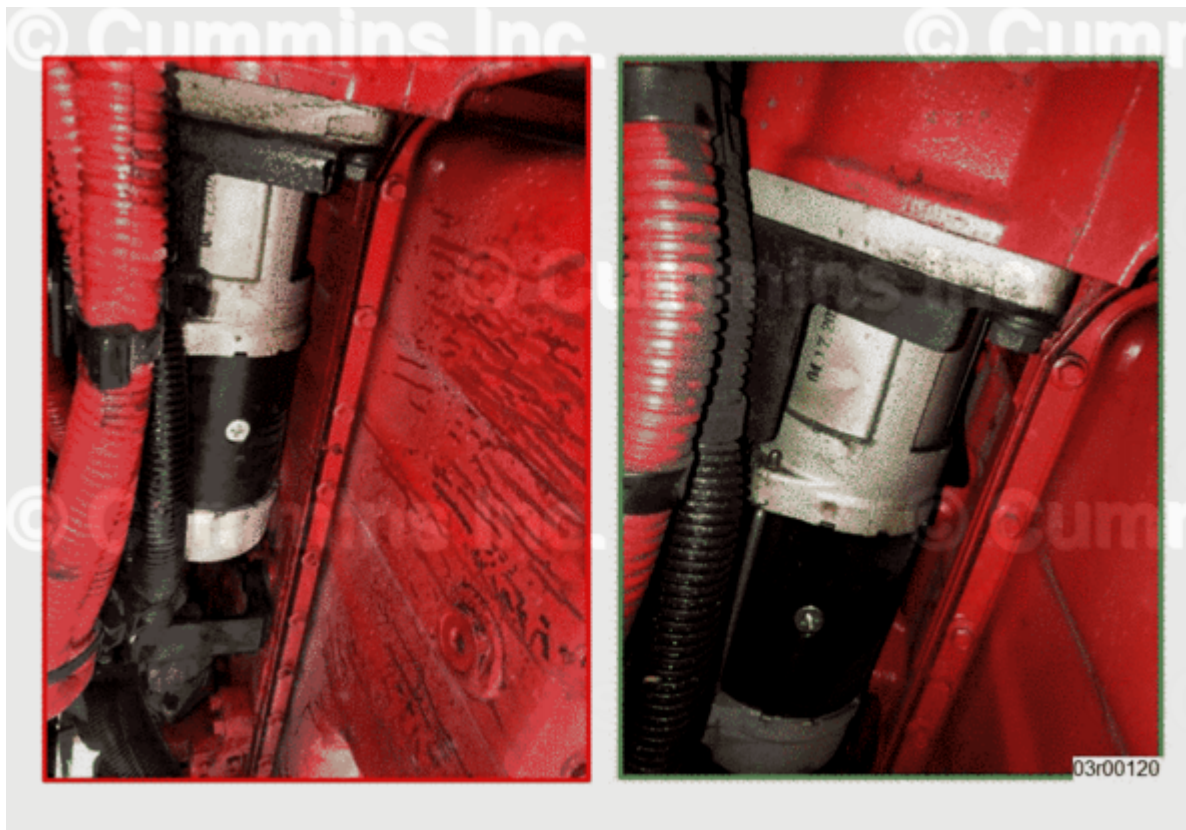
, Left: Signs of Excessive Oil from Crankcase Breather Tube. Right: Normal Oil from Crankcase Breather Tube.
